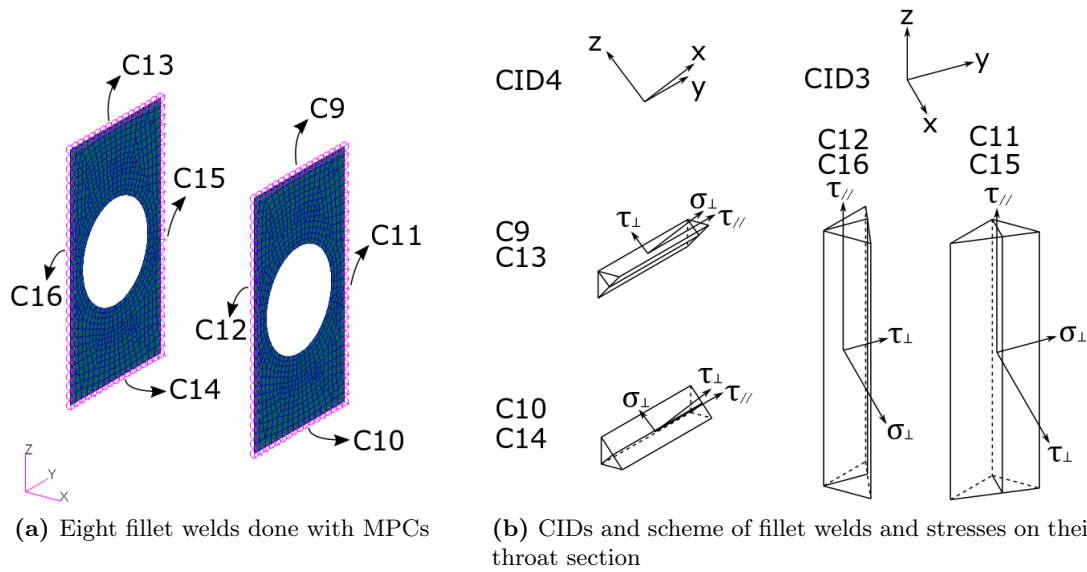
Fillet welds and coordinate systems of the welding between the plates and beam with axis aligned to X-axis
